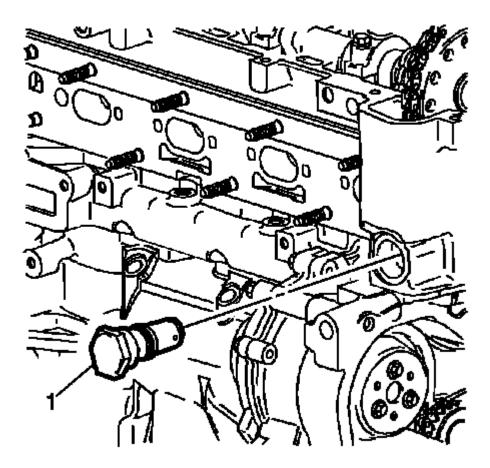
Timing Chain & Camshaft Position Actuator Courtesy of GENERAL MOTORS COMPANY
